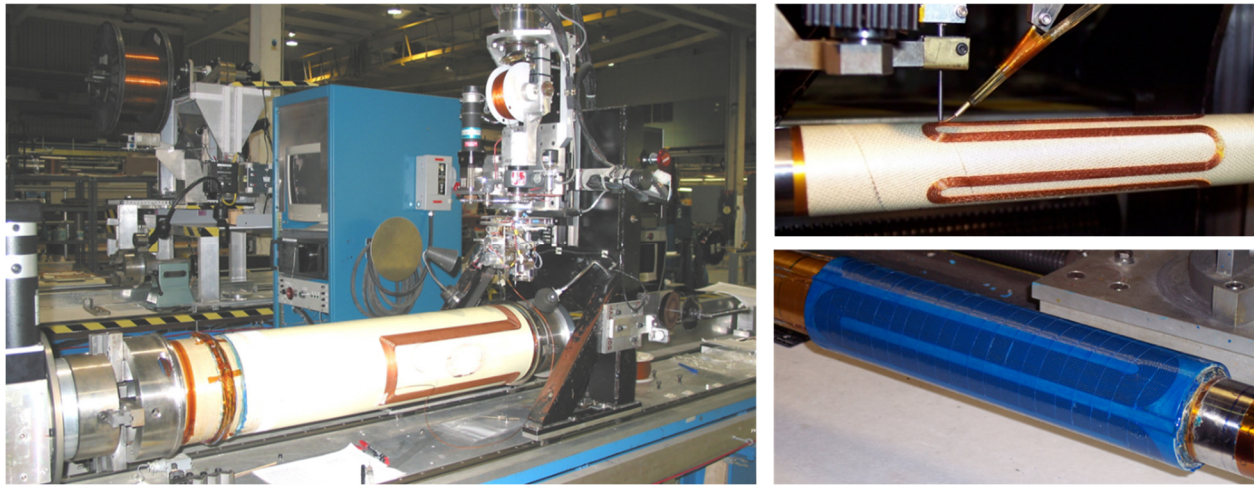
The Direct Wind Machine with its main components (left); superconducting wire directly being laid on the insulated tube and bonded with ultrasound heating (top-right); and final package after filler/epoxy addition (bottom-right).
